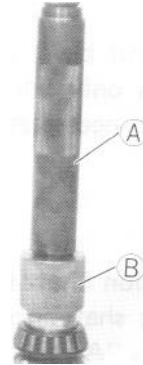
(A) Special tool (Bearing installer 09913-75510)
